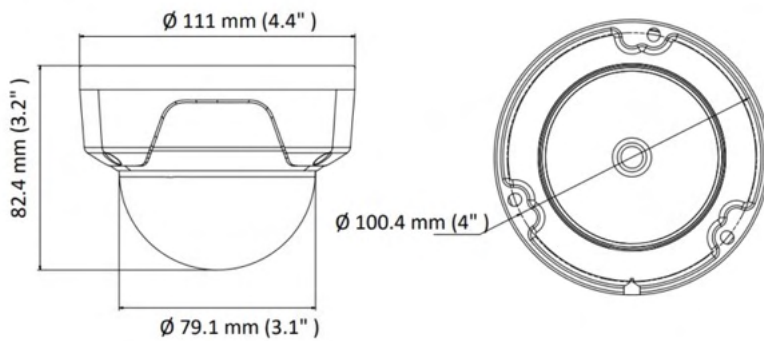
Dome Cam. Dimensions 1 (CCTV Kits, n.d.)
